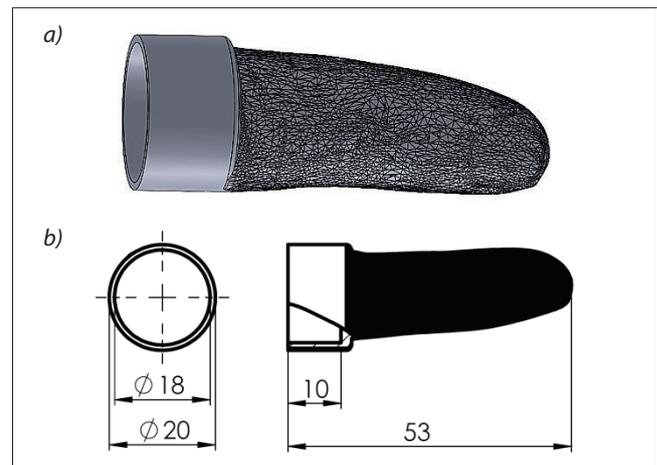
Rebuilt model of the little finger: a) Solidworks part, b) little finger dimensions
